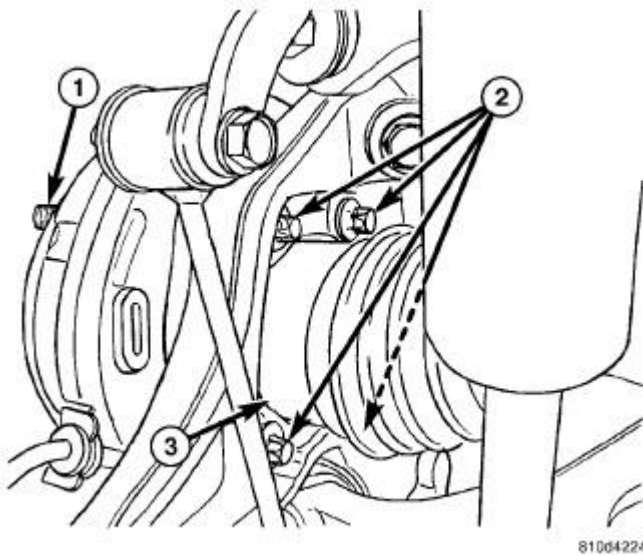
Hub & Bearing, Mounting Bolts & Half Shaft
